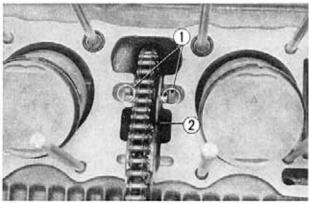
① Tensioner roller mounting rubbers ② Cam chain tensioner
